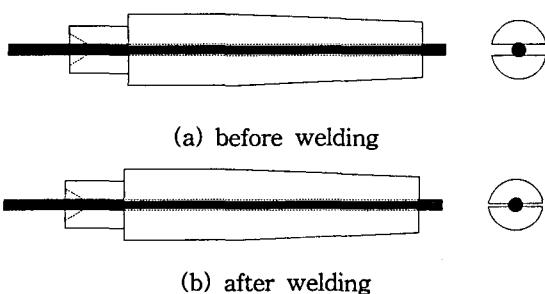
Schematic diagram of self-controlled contact tip - (a) before welding and (b) after welding
